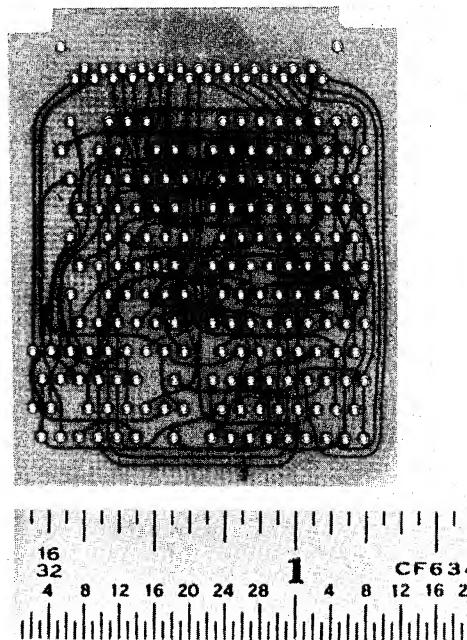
Miniaturized three-layer Encapsulayer with holes located on 0.050 in. centers.
